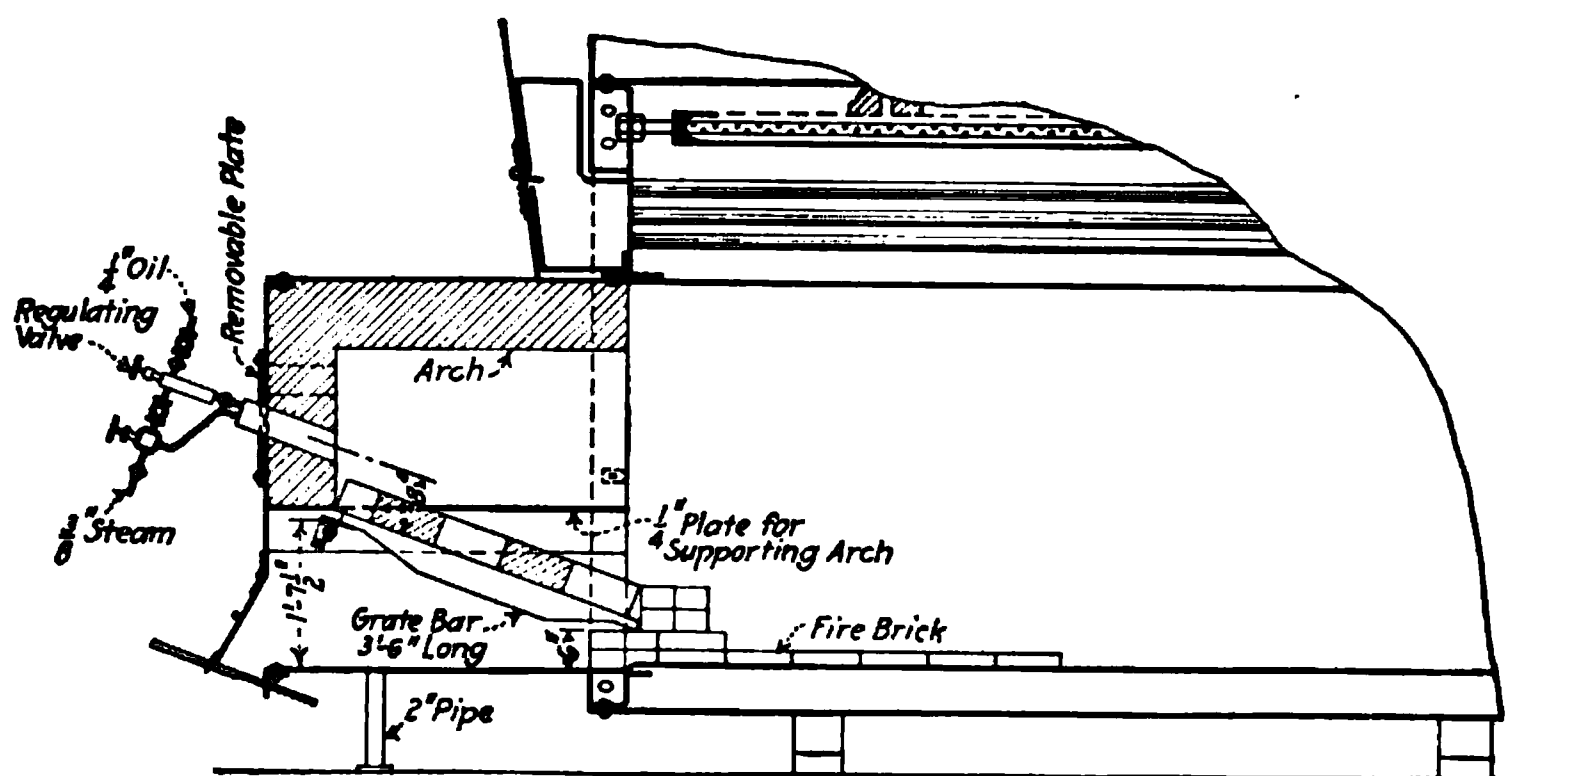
Lockett flat flame oil burner under Scotch marine boiler.
